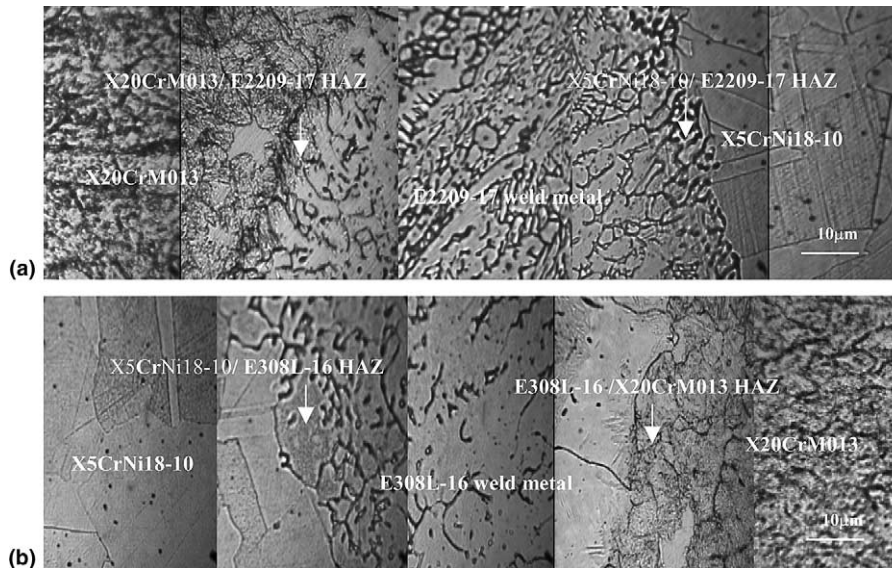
(a) Microstructure of the X5CrNi18-10/E2209-17/X20CrMo13 weldment. (b) X5CrNi18-10/E308L-16/X20CrMo13 weldment (X50).
